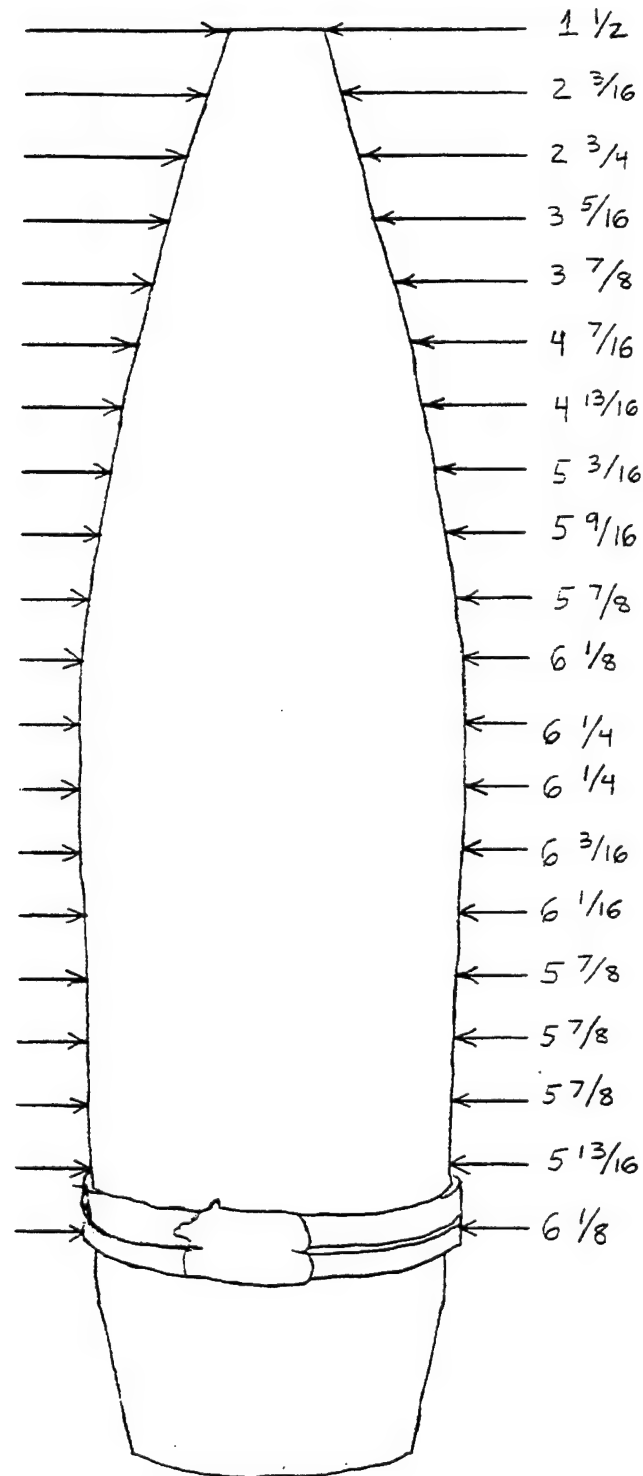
Schematic of deformed M107 round after test no. 18 (front side view, side facing flyer plate).
